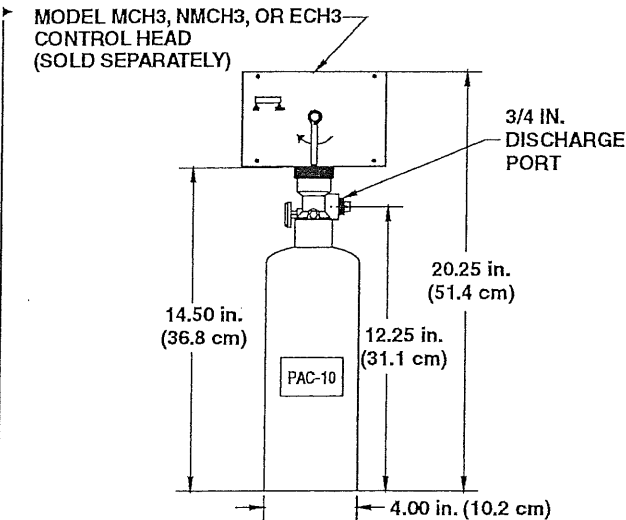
Model PAC-10 Pneumatic Actuating Cylinder.
